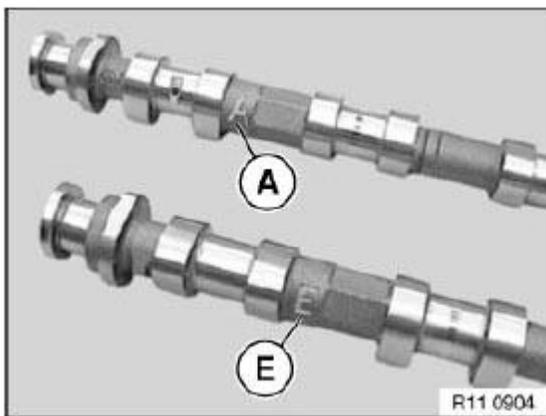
Identifying Exhaust Camshaft And Inlet Camshaft
